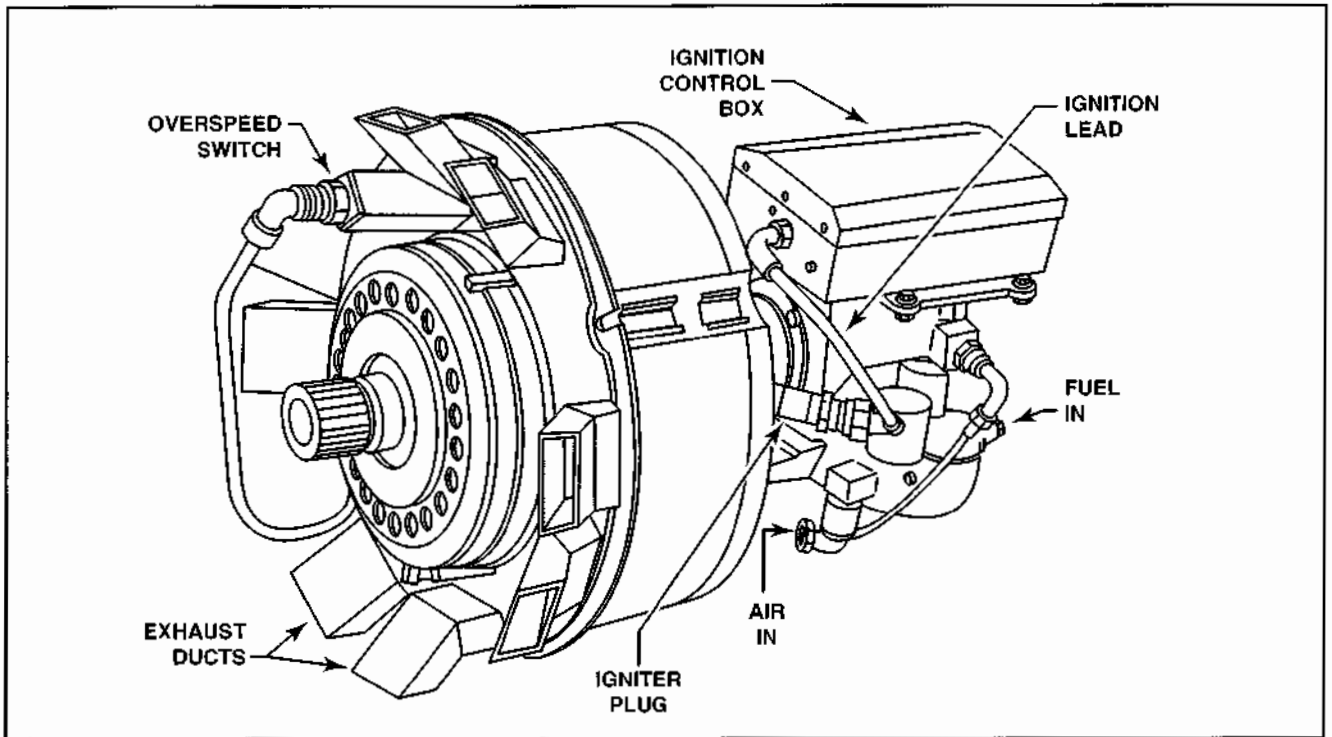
A combustion starter is a gas turbine engine that delivers engine starting power through a high-ratio reduction gear system. Operation of a combustion starter typically consists of actuating a single cockpit switch.
